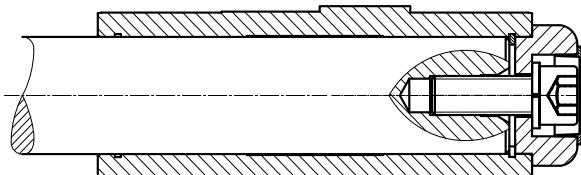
Gear unit mounted to shaft without a shoulder using the fastening element
